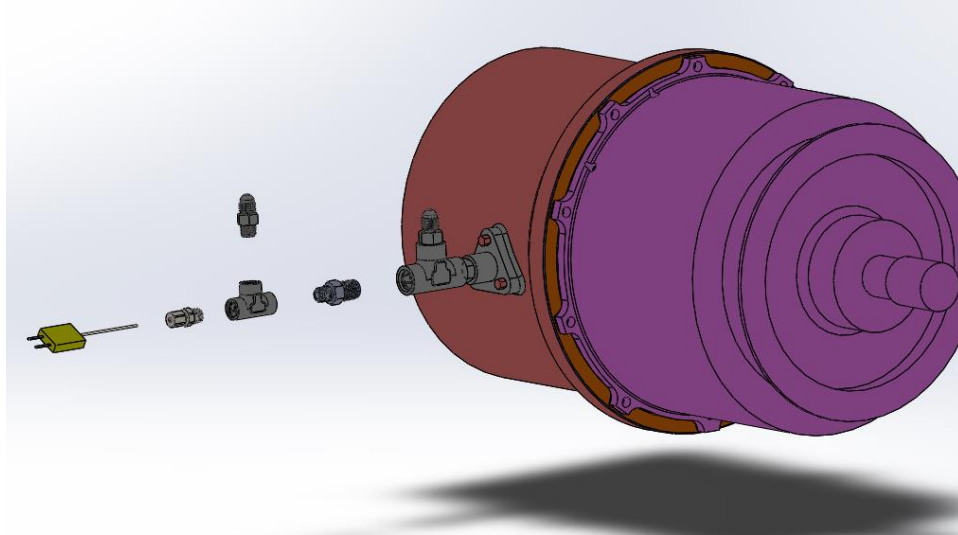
Stage 3 Initial Design Instrumentation Assembly
